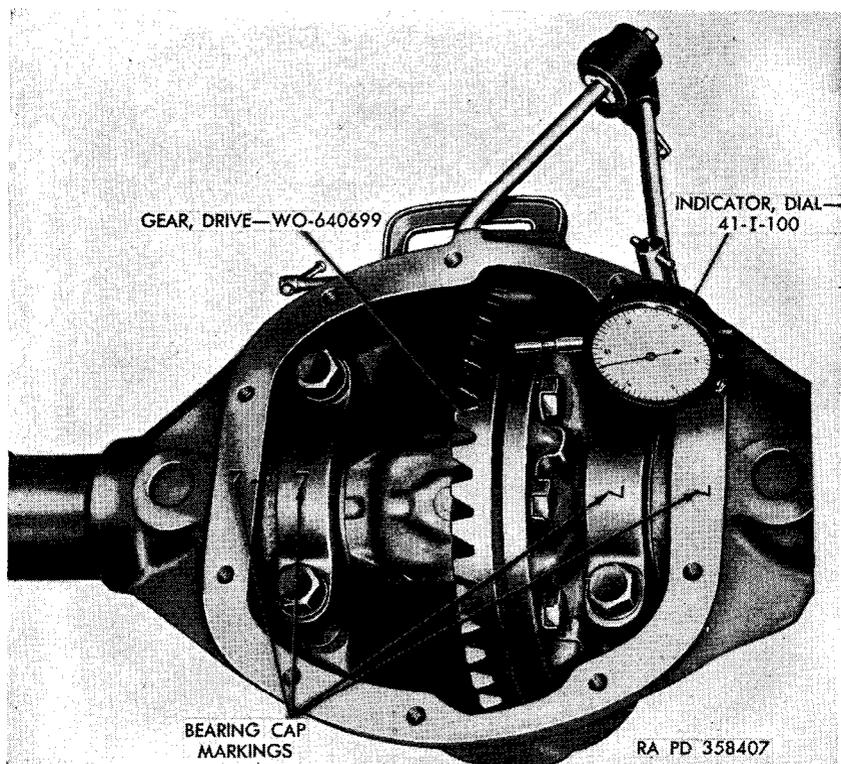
Checking drive gear run-out using dial indicator 41-I-100.
